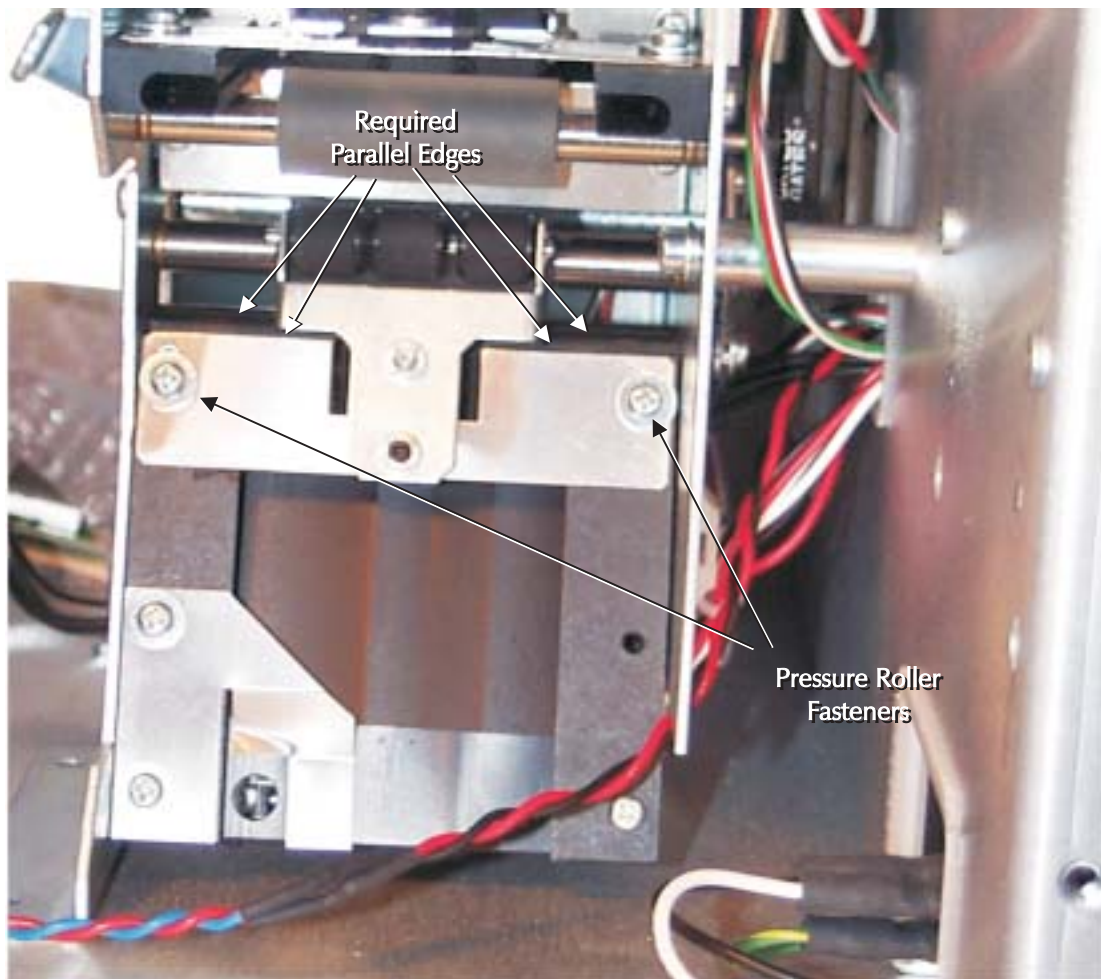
Lower Clear Card Feeder Pressure Roller Adjustment.
